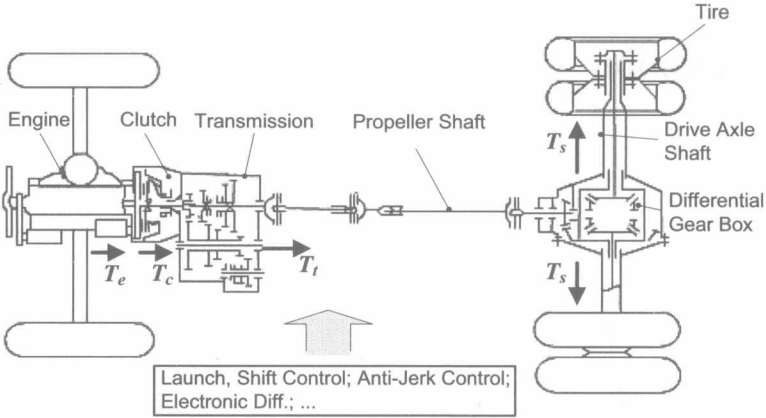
Drivetrain of FR (Front Engine, Rear Wheel Drive) vehicle [30]: T_e , engine torque; T_c , clutch torque; T_t , transmission output torque; T_s , torque of drive axle shaft
